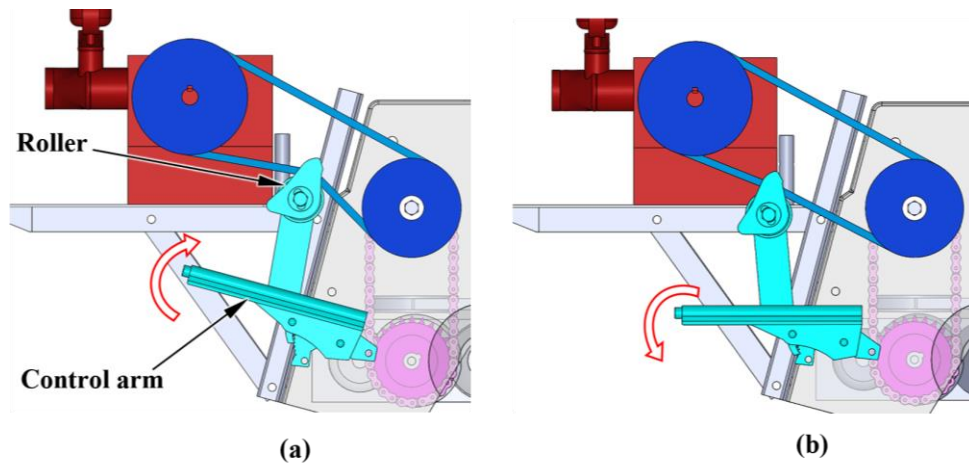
Water sprayer disengagement mechanism (a) Engage, (b) Disengage
